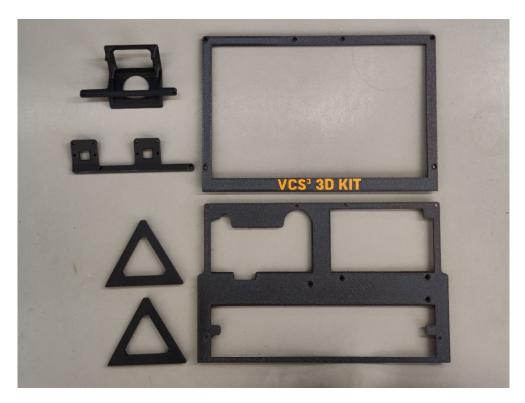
3D printed parts required for 3D kit assembly. Clockwise from top left: 1x VCS³ holder, 1x Bezel, 1x Frame, 2x Leg, 1x Camera Mount
